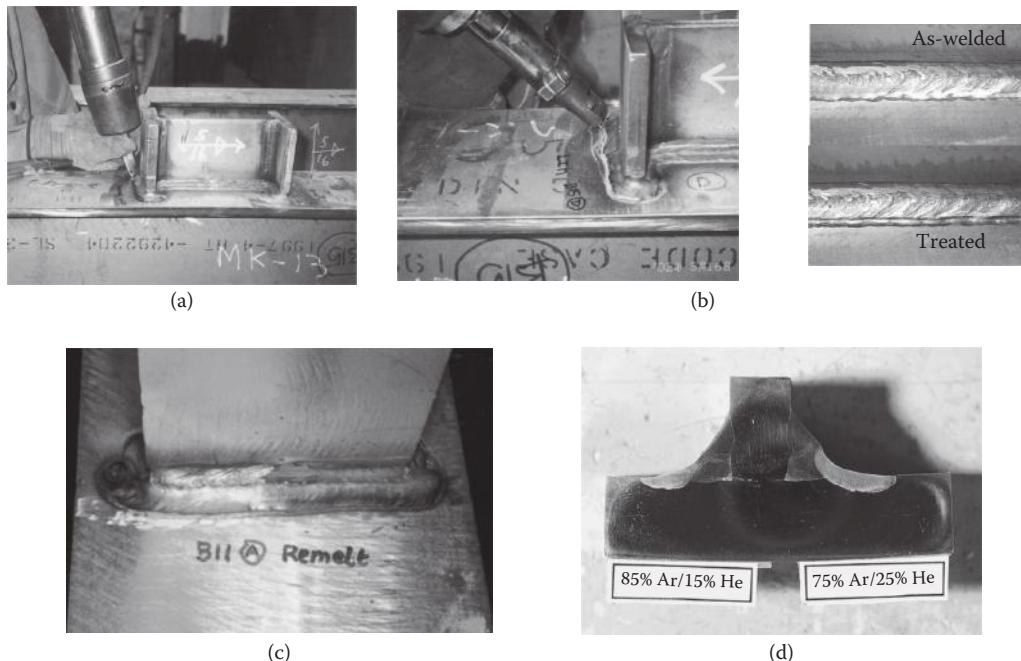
Methods of weld treatment and weld repair: (a) air hammer peening, (b) ultrasonic impact treatment, (c) gas tungsten arc remelting, (d) gas tungsten arc eliminated fatigue crack at weld toe.
